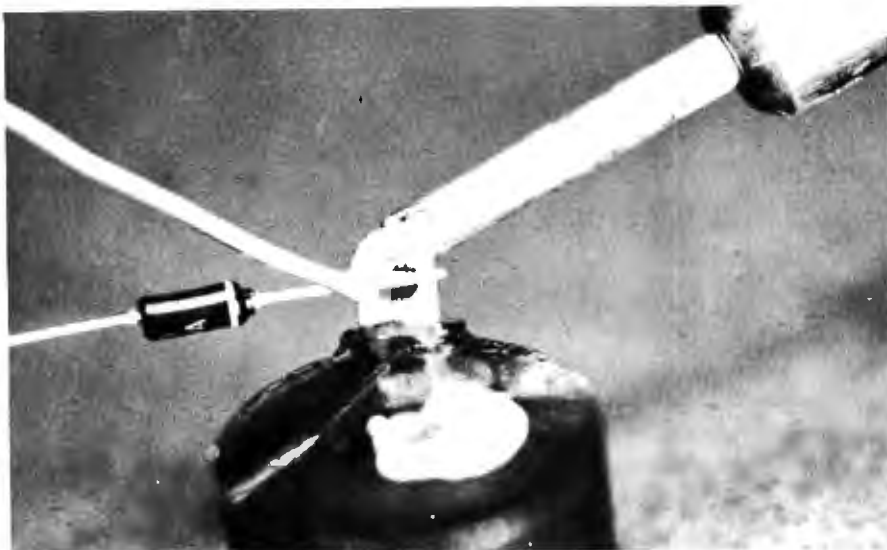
When soldering, touch the iron to the heaviest part. When the joint is hot enough, the solder will melt on the side opposite the iron.
